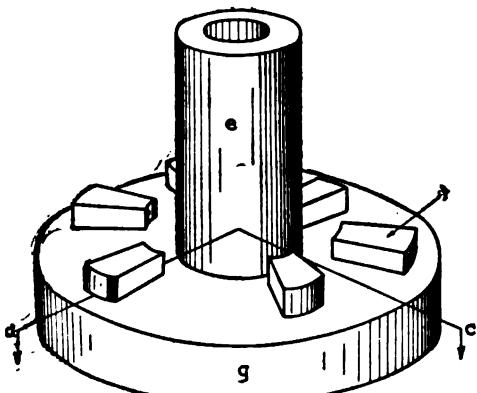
Casting Molded on Double-Draw Stripping-Plate Machine
